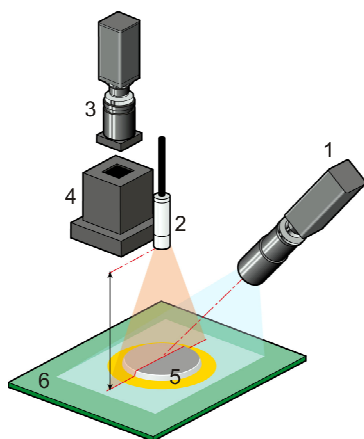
Principle of measuring values (position, shape, height and etc.) of deposit solders paste volume at solder paste inspection (SPI) system. 1 - Laser source, 2 - laser detector, 3 - operator camera, 4 - optics, 5 - deposited solder paste, 6 - printed circle board.
